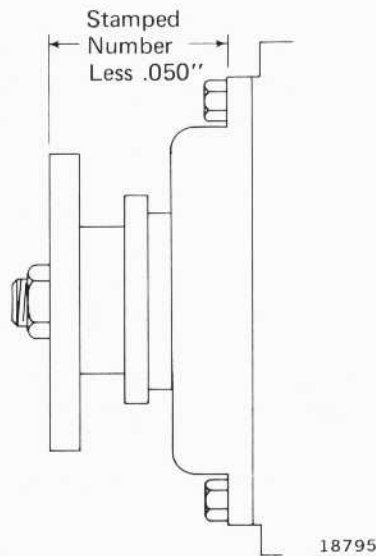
Auxiliary Generator Drive Thrust Measurement
